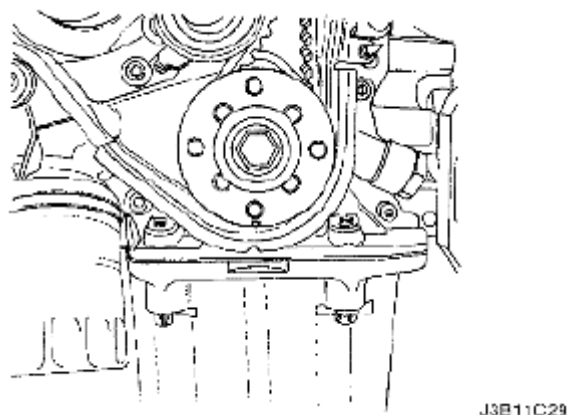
Identifying Timing Mark On Crankshaft Gear With Notch On Bottom Of Rear Timing Belt Cover
